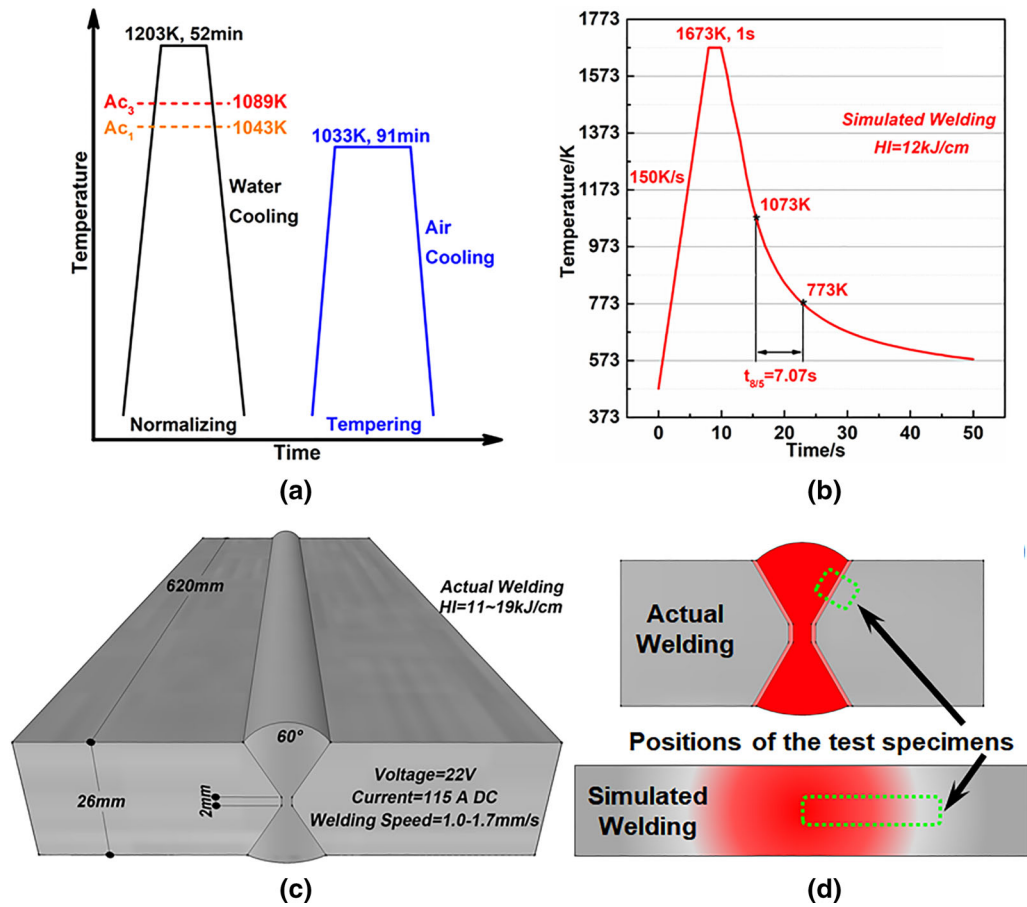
Thermal cycles of (a) normalizing and tempering heat treatment and (b) simulated welding; schematic diagrams of (c) actual welding weldment and (d) cross-section of actual welding and simulated welding weldments showing the positions where specimens for desired tests are taken. (The regions marked by green rectangles are used for microstructure observations and micro Vickers hardness measurements) (Color figure online).
